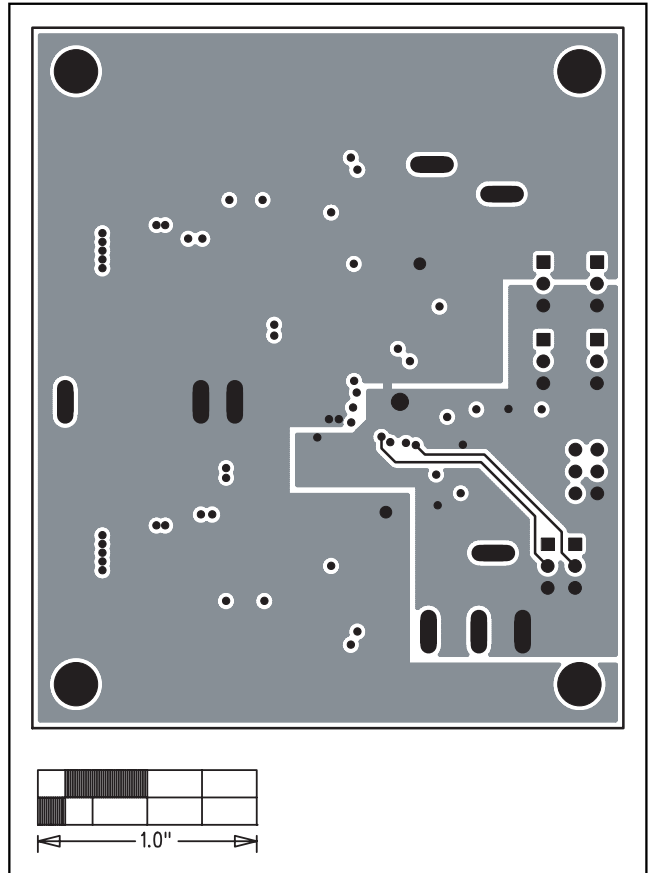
MAX1533 EV Kit PC Board Layout—Layer 3
